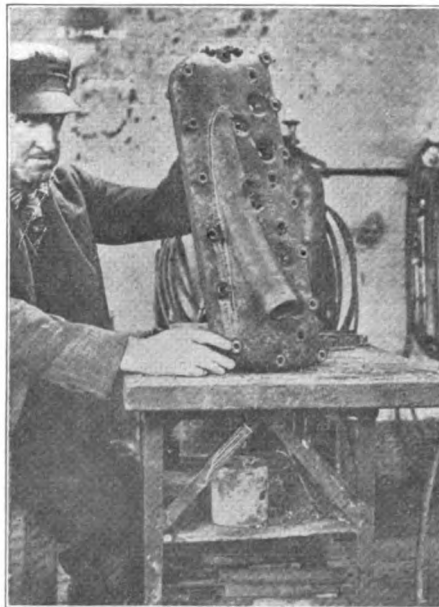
LOCATION AND EXTENT OF FRACTURE
